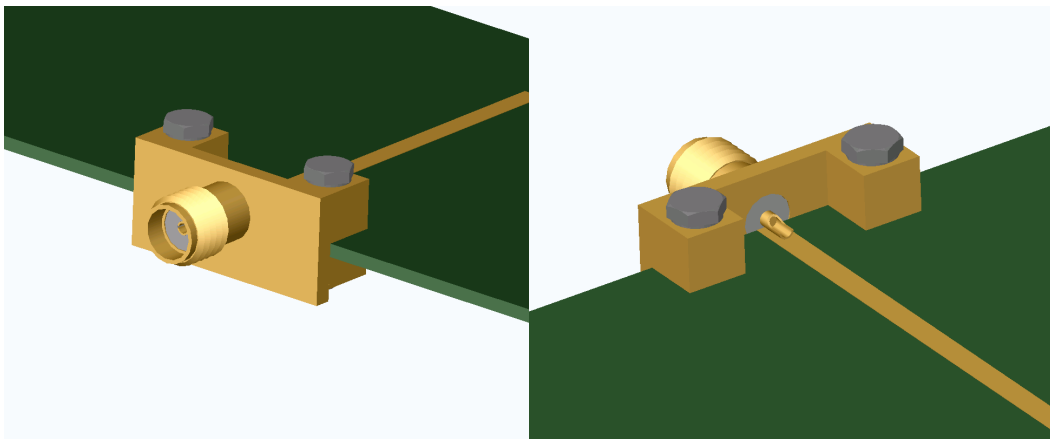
The SMA connector with flange geometry suitable for printed circuit board edge mounting.
